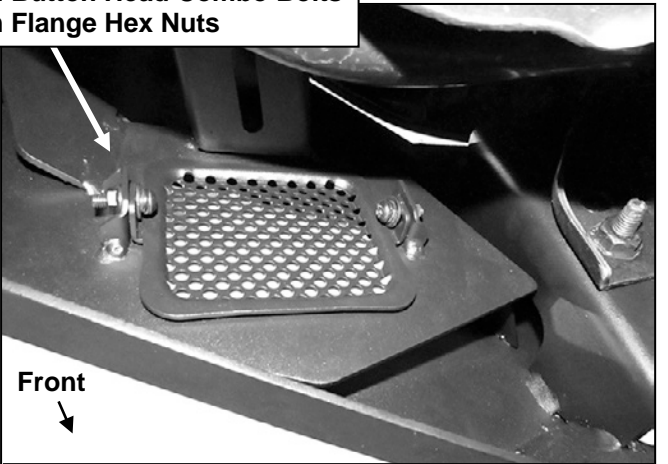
Example driver/left bumper bracket removed on model without tow hooks
